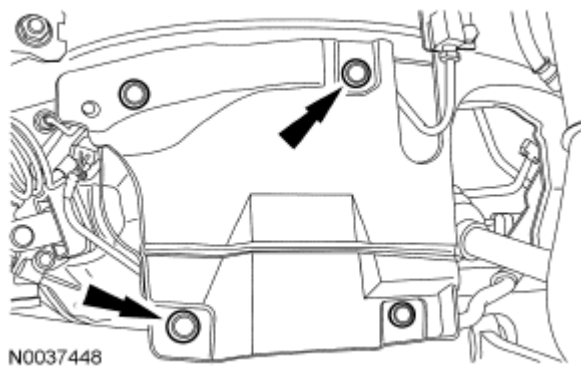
Locating LH Splash Shield Pin-Type Retainers
